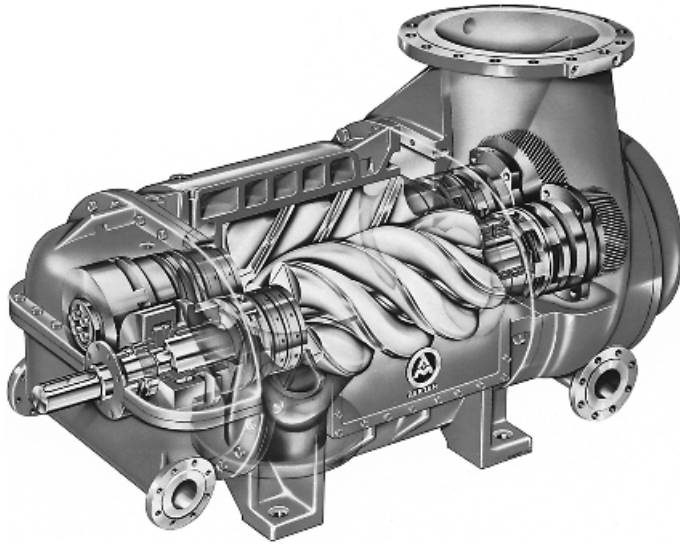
Rotary screw compressor (double-helical-screw machine). (*Aerzen USA Company, Coatesville, Pa.*)
